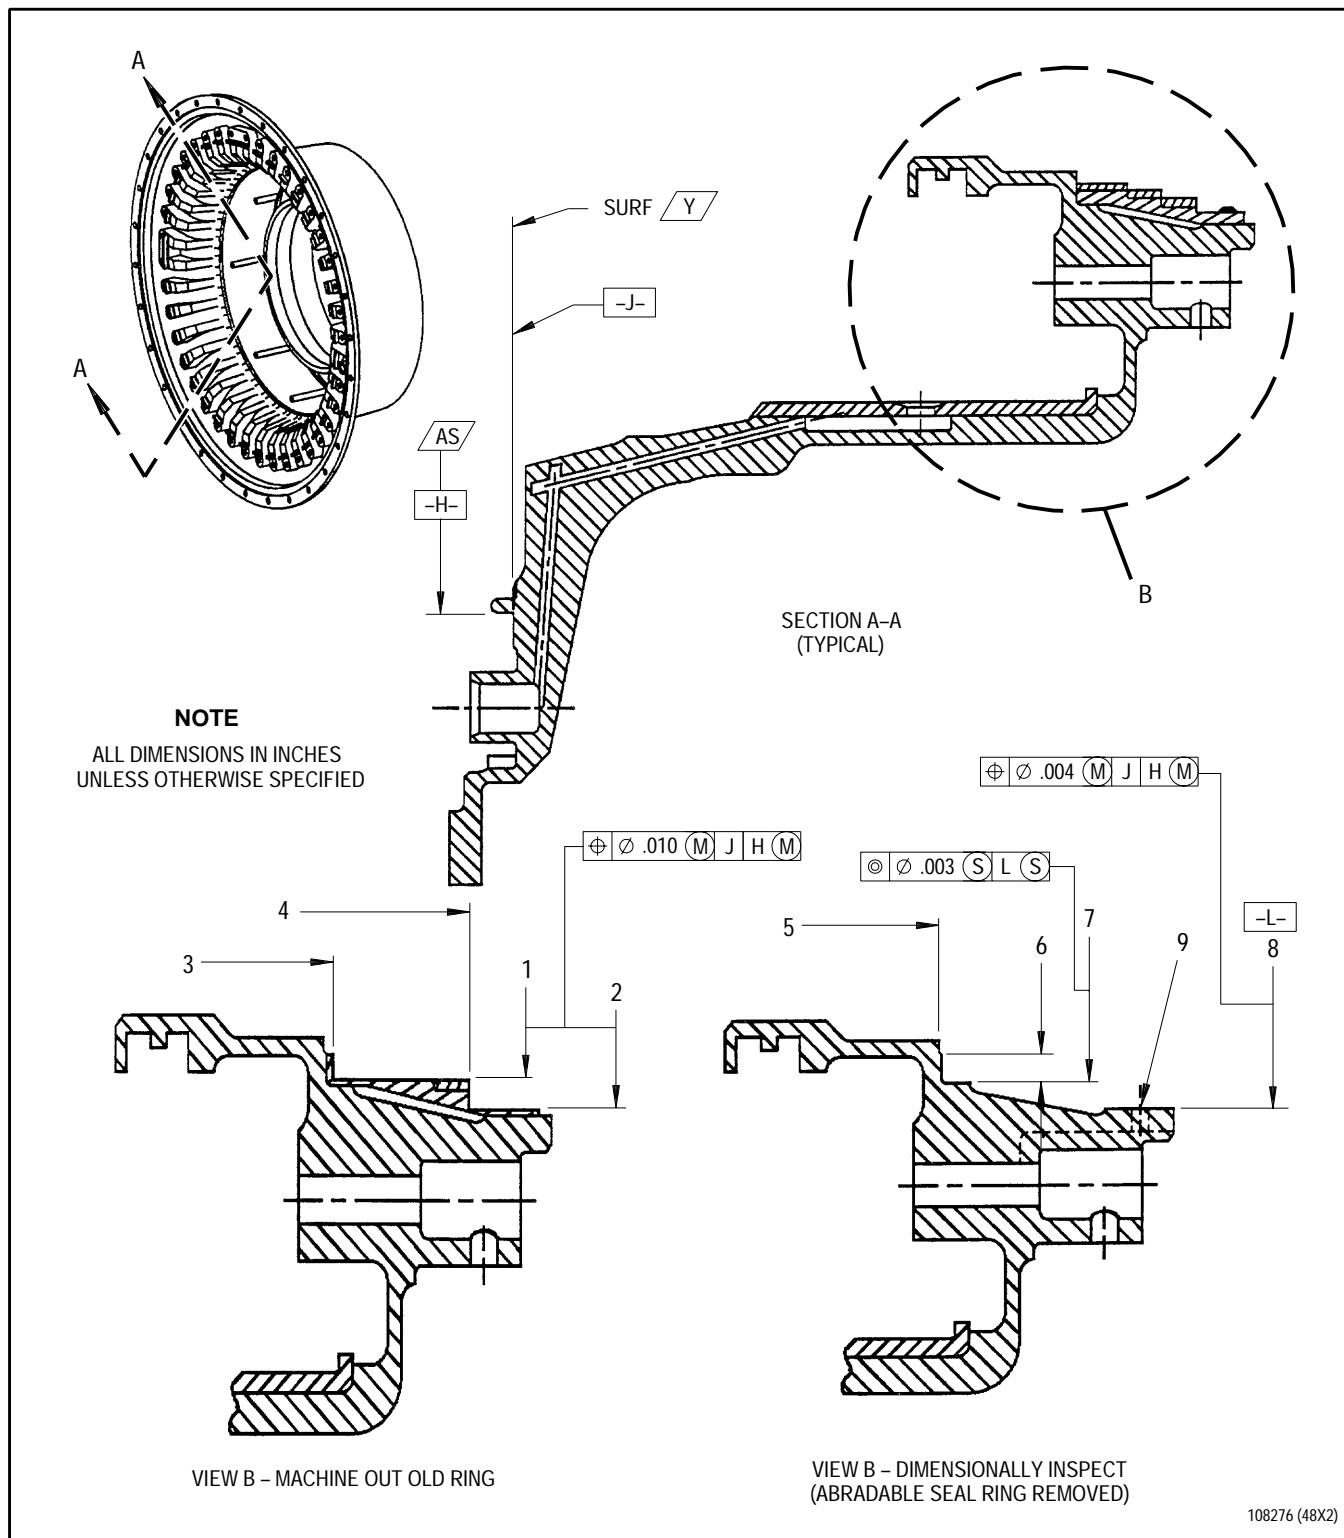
No. 3 Bearing Seal Support Assembly - Abradable Seal Ring Assembly Removal
